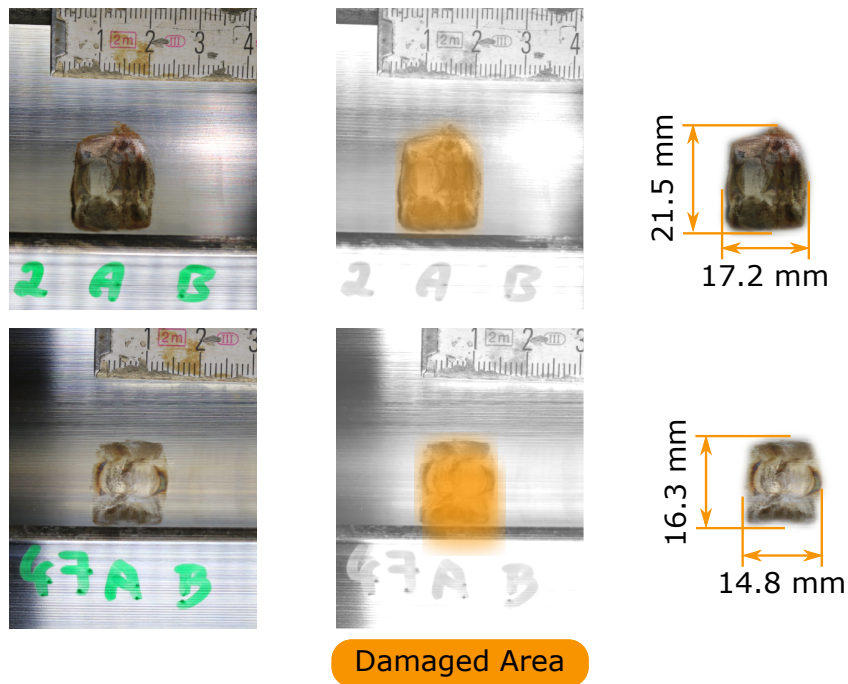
Exemplary raceway condition inner ring, Test ID 10, Bearing ID 0001
